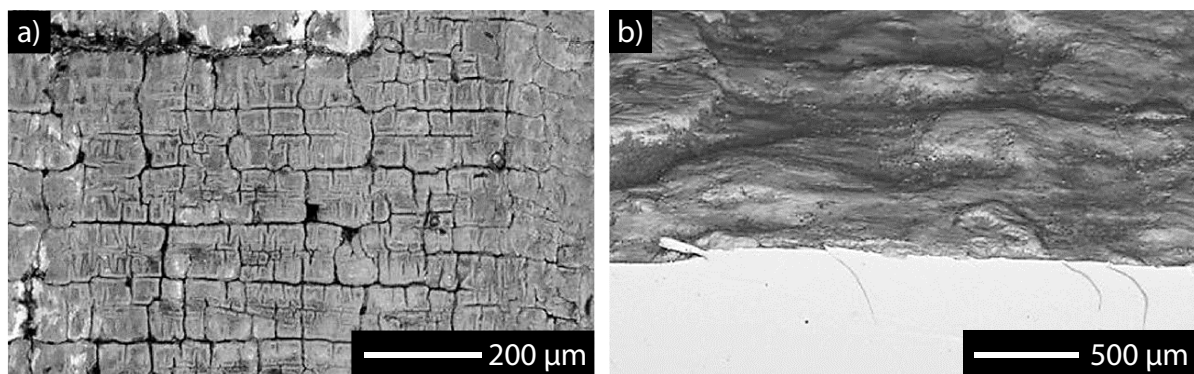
Examples of (a) thermomechanical surface fatigue crack networks after $N = 8,700$ cycles and (b) plastic deformation combined with abrasive wear and cross-sectional cracks after $N = 6,900$ cycles in hot forming tools, [GKH+14]
